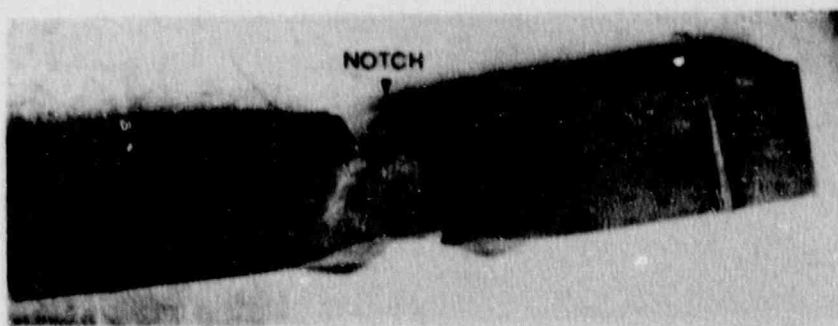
Charpy Impact Specimen Fracture Surfaces for Braidwood Unit 1
